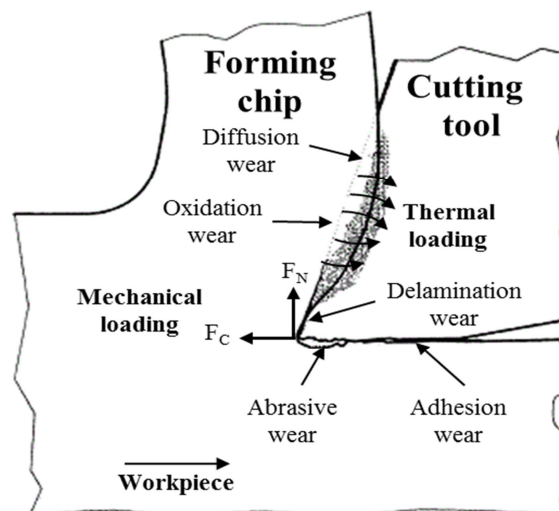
Mechanisms of tool wear during machining (adapted from [34])
